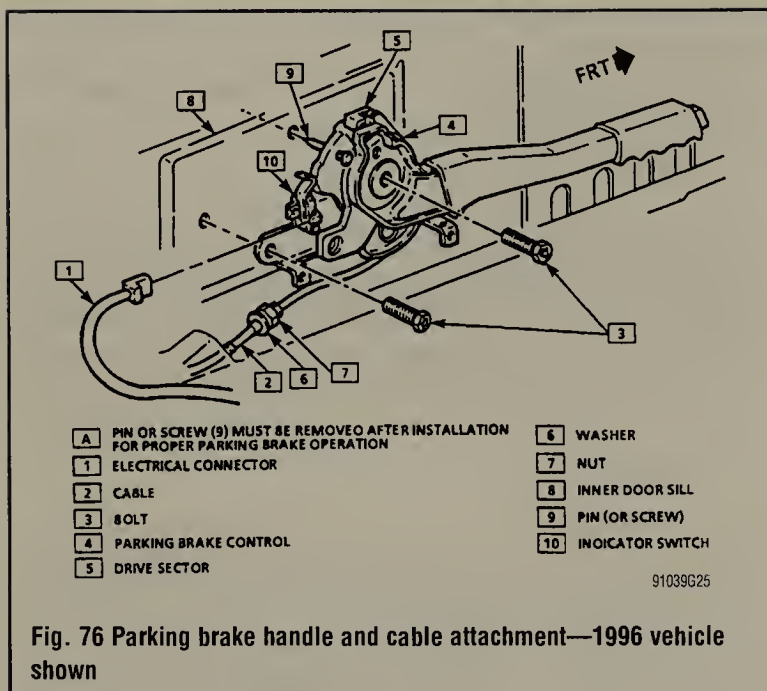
Parking brake handle and cable attachment—1996 vehicle shown
